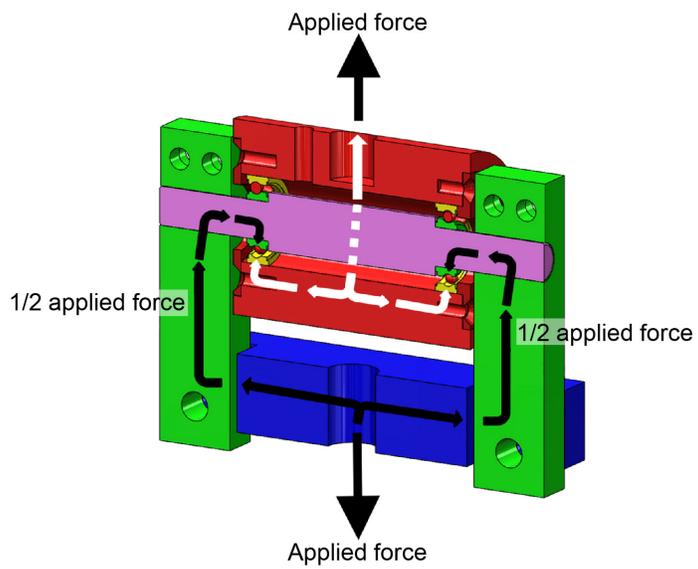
Cross-sectional schematic of bearing load fixture showing bearing arrangement and load path for applied radial load.
